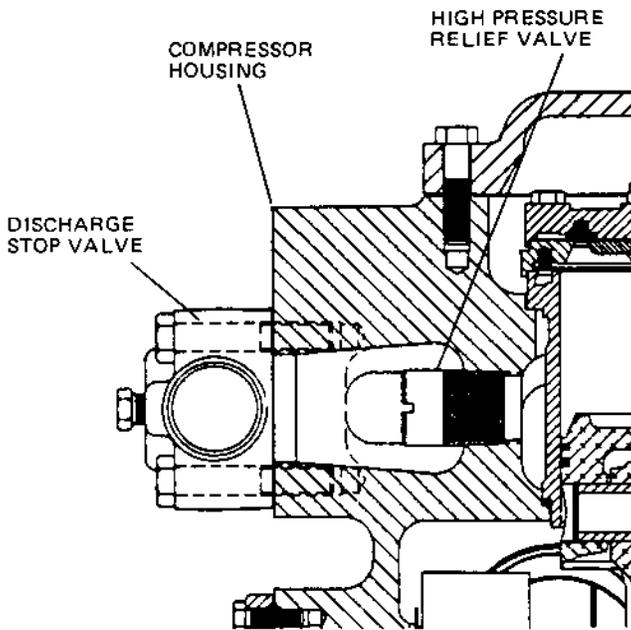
LOCATION OF HIGH PRESSURE RELIEF VALVE - 6 Cylinder Compressor Shown
